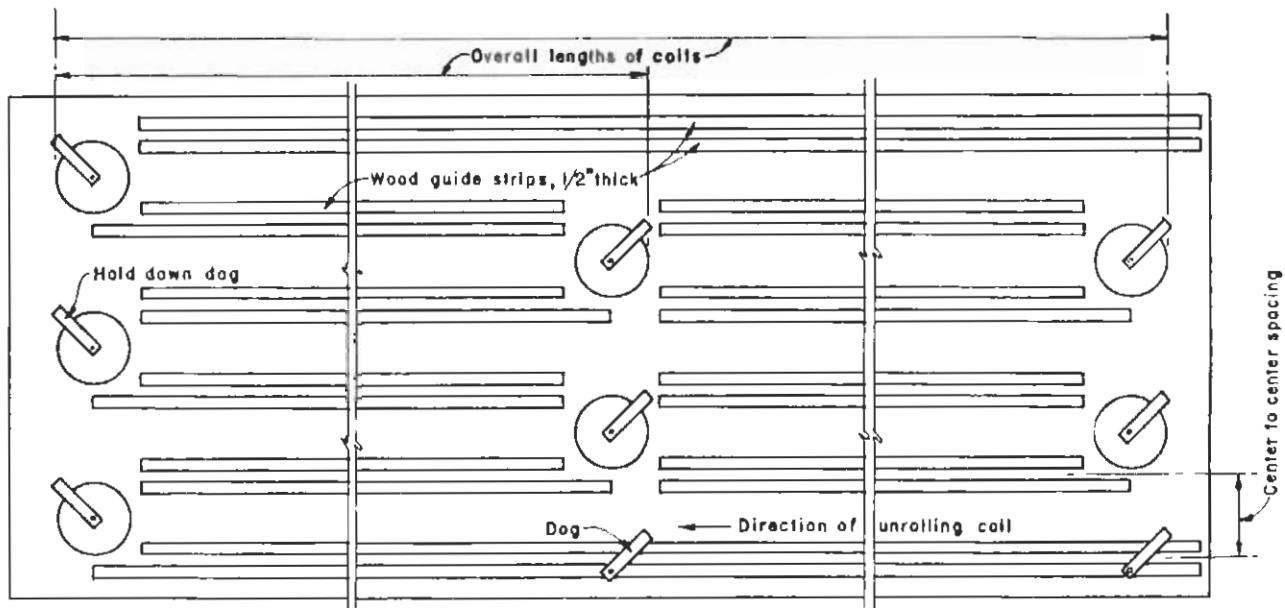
FORMING BENCH FOR SINUOUS RADIANT HEATING COILS USING COPPER WATER TUBE
